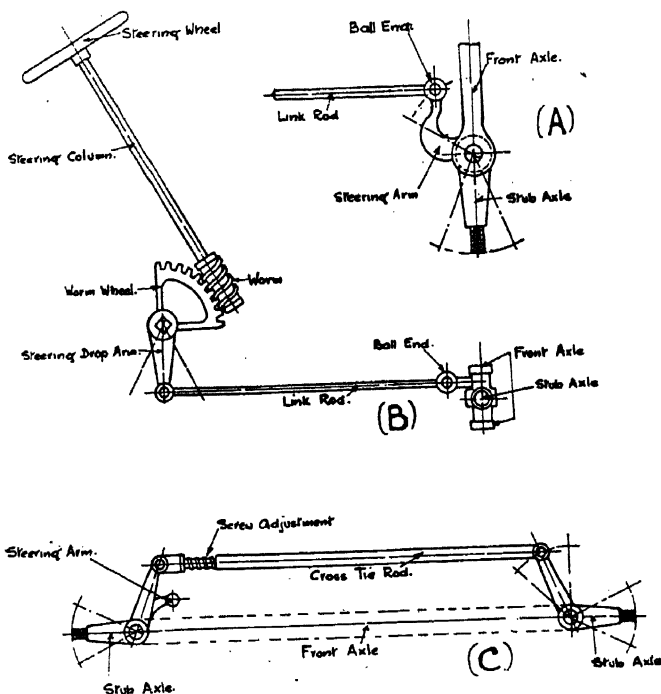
Principle of the Ackermann Steering Mechanism.
